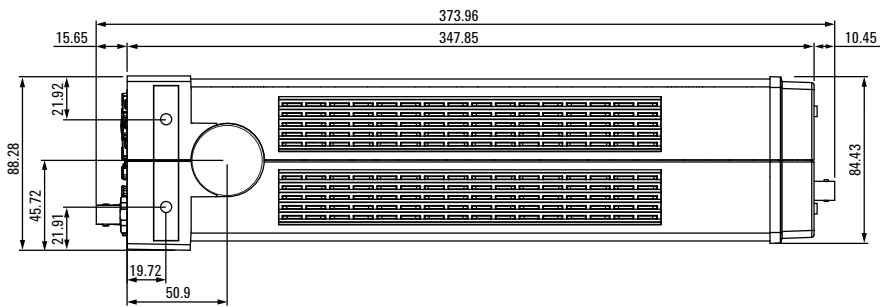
Dimensions (side view, without handle and bumper, in millimeters, nominal)
